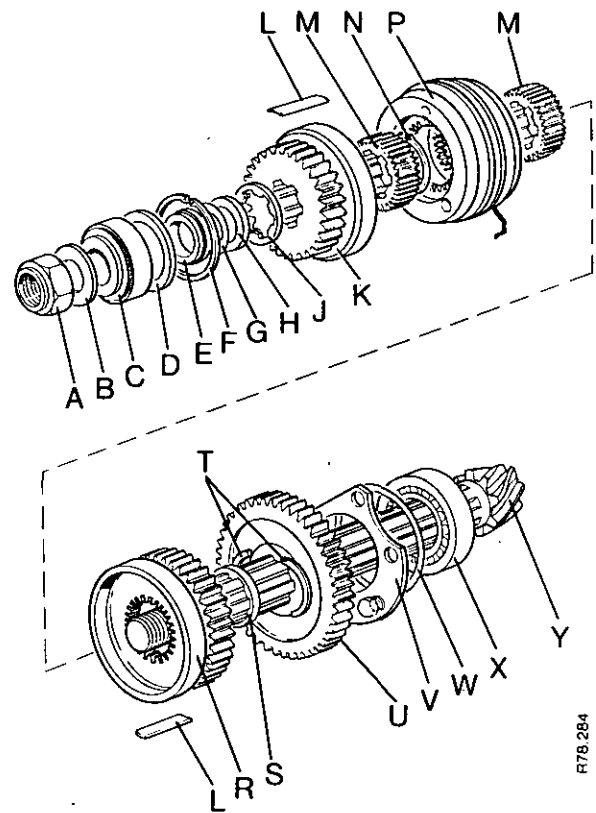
BEVEL PINION SHAFT ASSEMBLY
